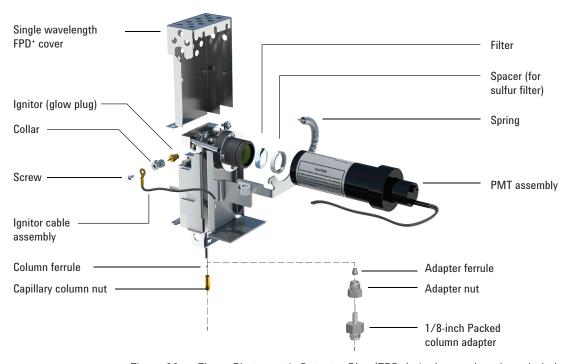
Flame Photometric Detector Plus (FPD+) single wavelength exploded parts
